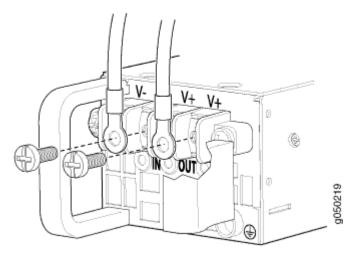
DC Power Supply Faceplate for a QFX3500, QFX3600 or QFX3600-I Device
